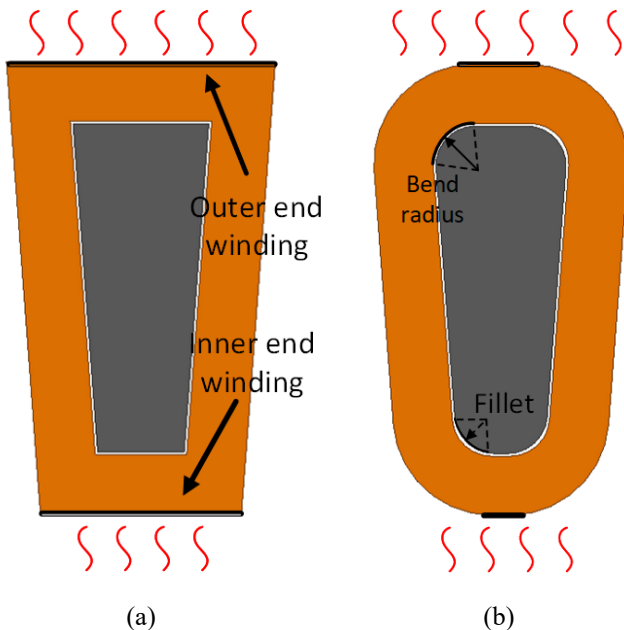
Stator tooth cross section (a) simple design (b) fabricating model. Red squiggles indicate the surfaces where heat is removed.
